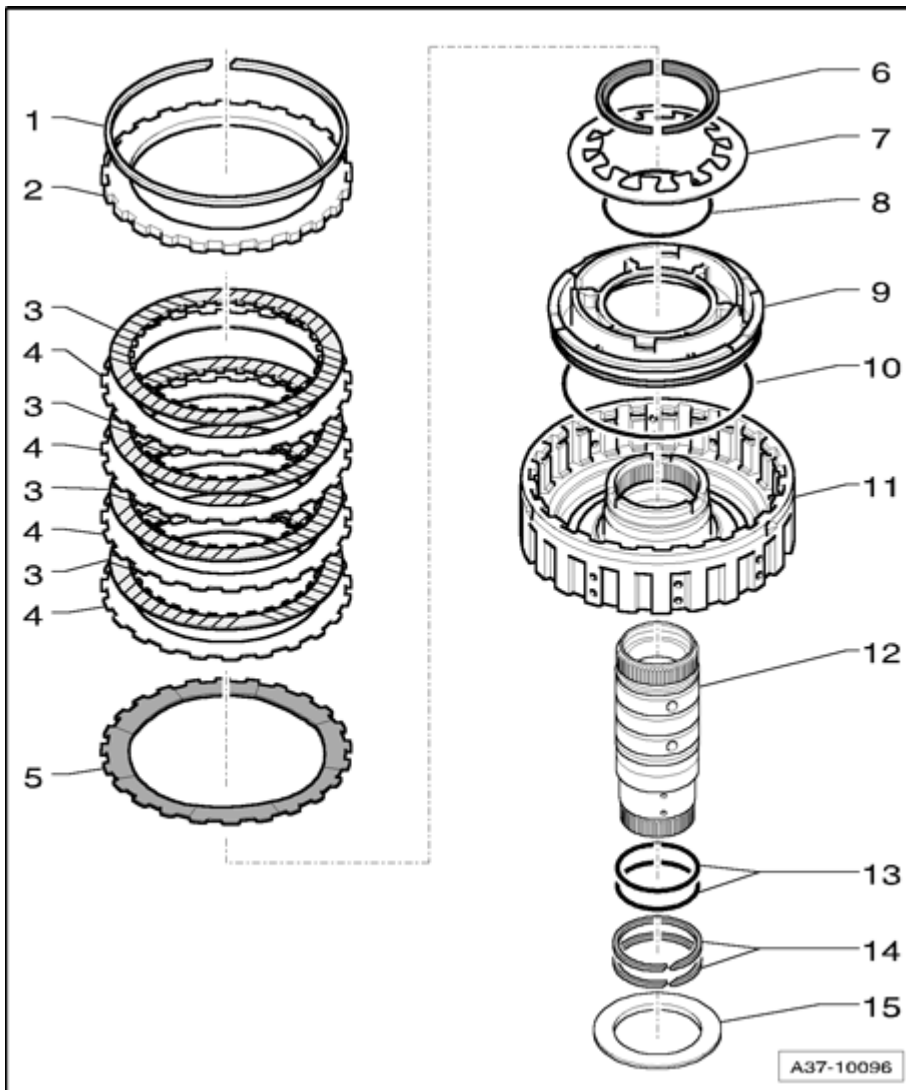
Clutch "C" With Sun Shaft, Assembly Overview
